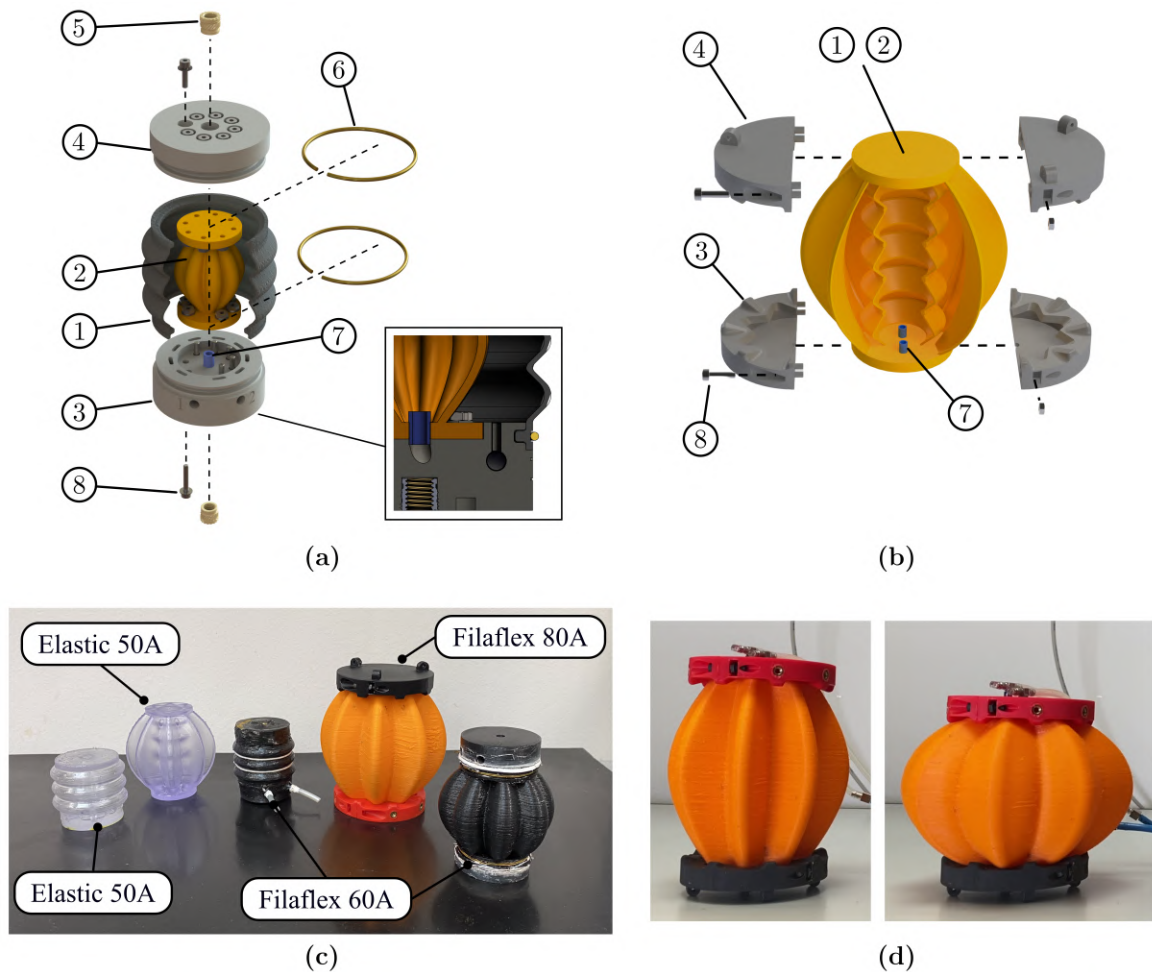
BiSoft.Q executive design. (a) Assembly design with end caps to close the membrane internal volumes. The connection to the rest of the mechanical system is achieved through metallic inserts integrated into the plastic end fittings. (b) Monolithic design. The mechanical connection is here established through the use of hinge joint. (1) bellows, (2) pleated membrane, (3) lower cap with internal channels, (4) upper cap, (5) metallic insert, (6) clamping ring, (7) polyurethane tubing, (8) socket head cap screw. (c) BiSoft.Q prototypes. (d) BiSoft.Q type A realized with the assembly design in its maximum and minimum configurations.
